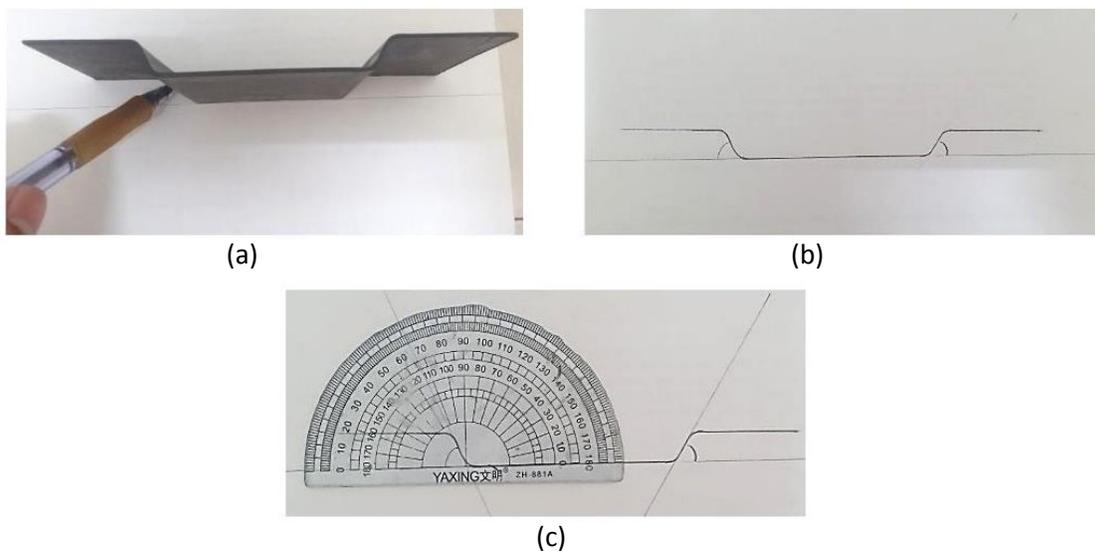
Procedures of measuring the bending angles of stamped workpiece: (a) tracing the bending profile, (b) sketched bending profile, (c) measuring of bending angles.
